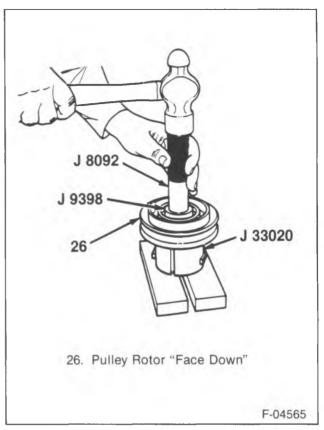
Removing the Bearing from the Pulley Rotor Assembly
